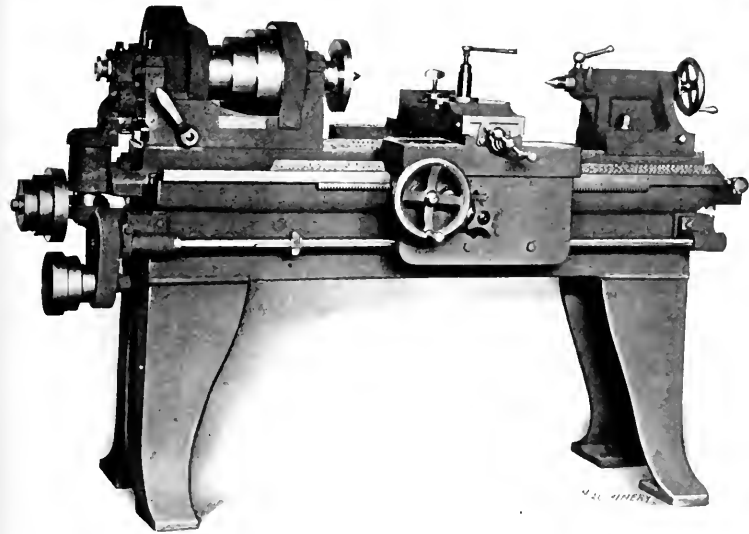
Front View of Whitcomb-Blaisdell Taper Turning Lathe
